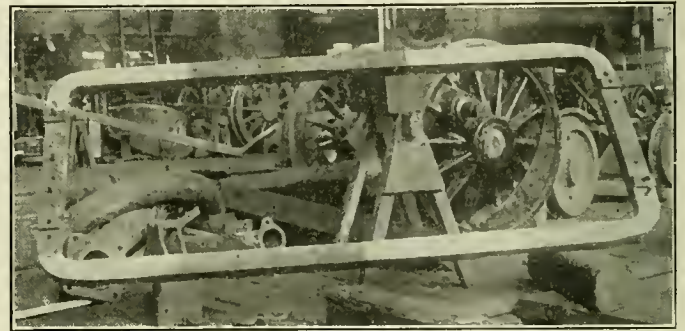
Locomotive Mud Ring Reclaimed by Arc Welding
